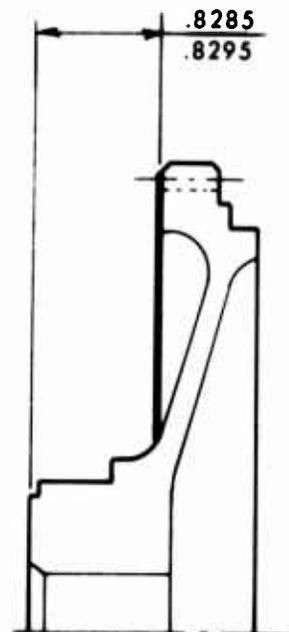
RG351-11182-106, Machine Operation Drawing.
